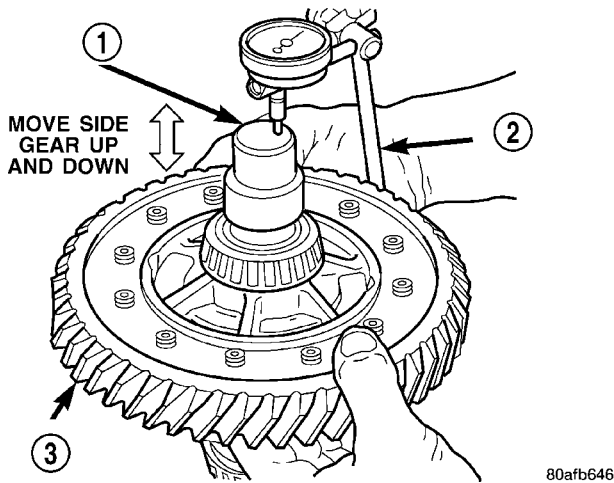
Checking Side Gear End Play (Ring Gear Side)
